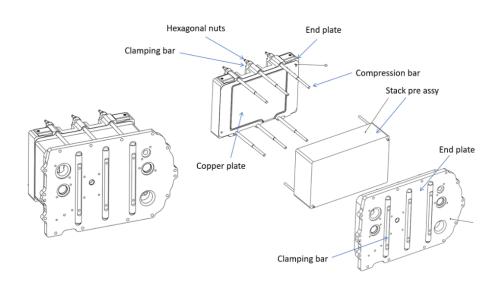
48 kW PEMFC stack assembly final step during manufacturing
